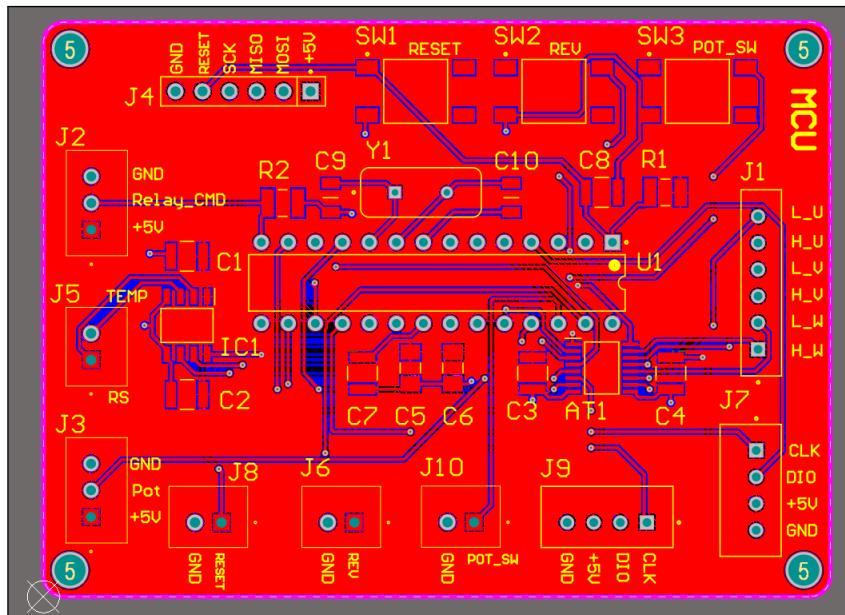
MCU Circuit Top Layer PCB 2D Layout
